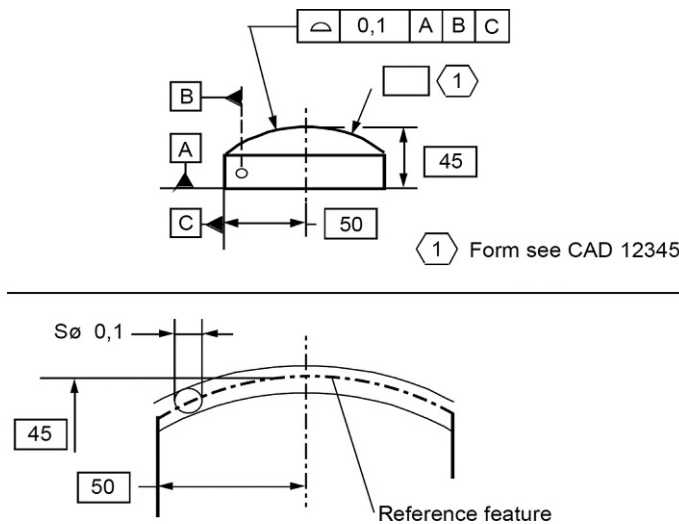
Profile surface tolerance for location of an integral surface
